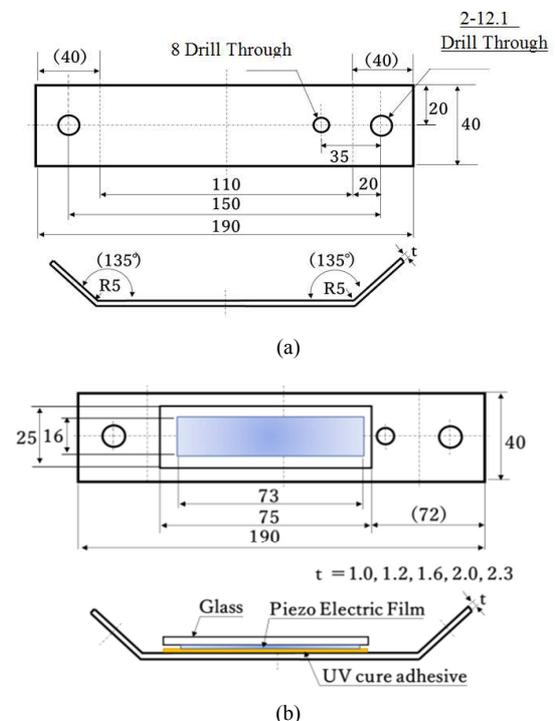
Presents details of the shape and dimensions of the piezoelectric composite sensor.
